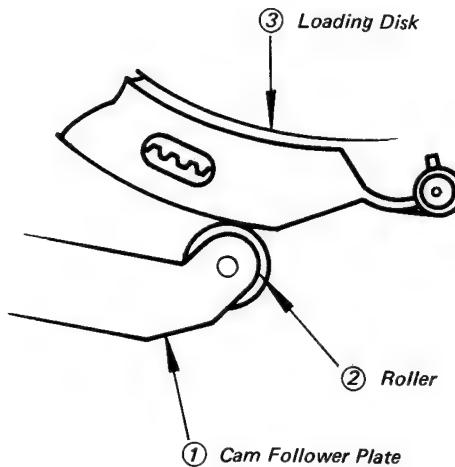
Loading Disk Turning for Removal of Band Brake
